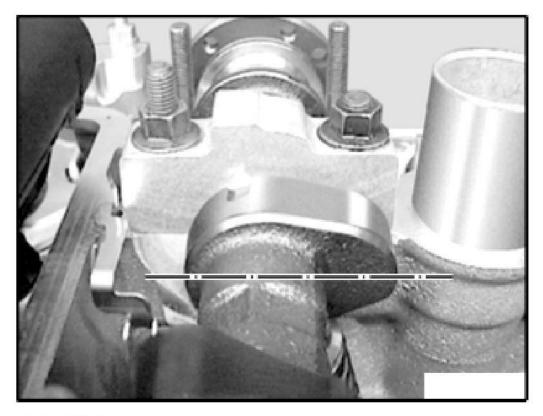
Identifying Thrust Bearing Flange Retaining Nuts Courtesy of BMW OF NORTH AMERICA, INC.
